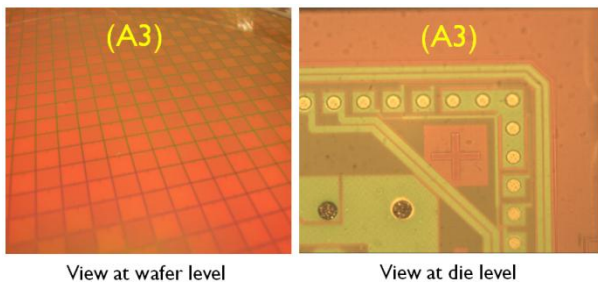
Aspect of material A3 after spin coating on top-die bumped wafer and dicing (die level)
